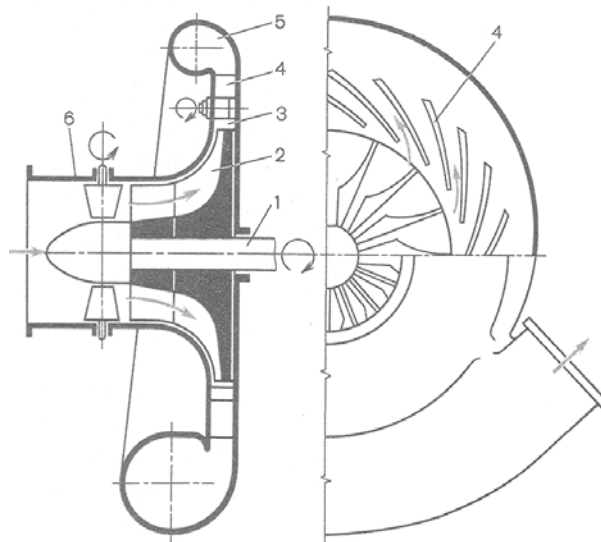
Schematic diagram of a single-stage centrifugal compressor: 1 - smooth shaft; 2 - impeller; 3 - diffuser; 4 - blades; 5 - air collector; 6 - input device
